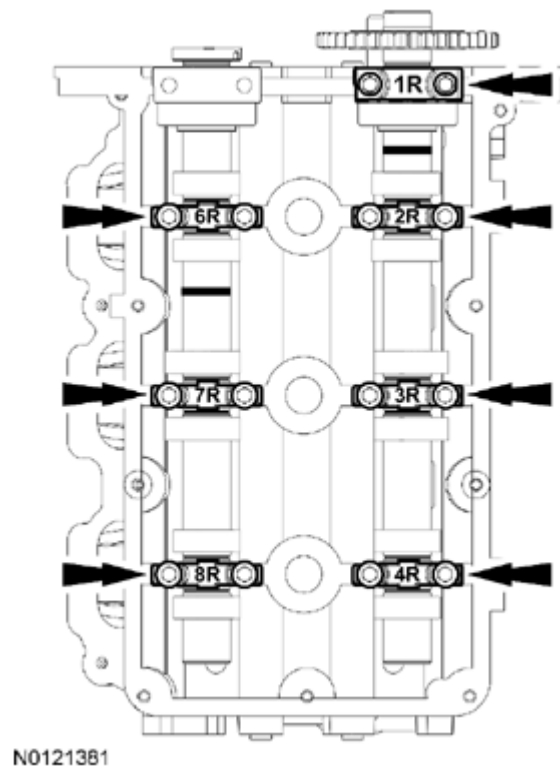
Locating Camshaft Bearing Cap Position And Orientation Marks
